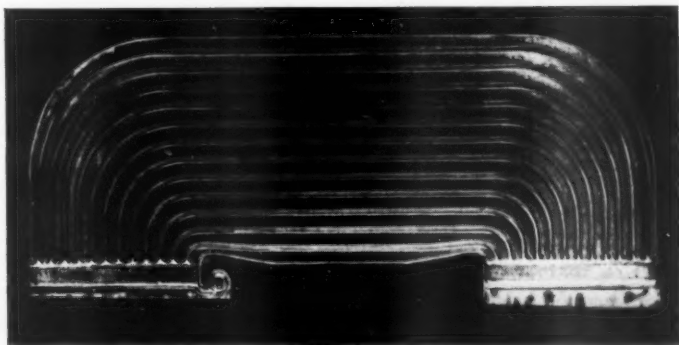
Pressure welded German heat-exchanger element.
